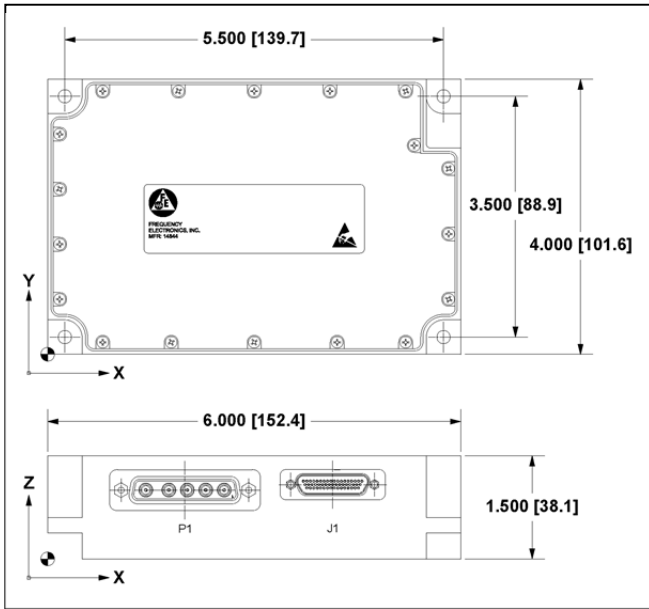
Outline drawing of Rb oscillator. Dimensions are in inches [millimeters].
